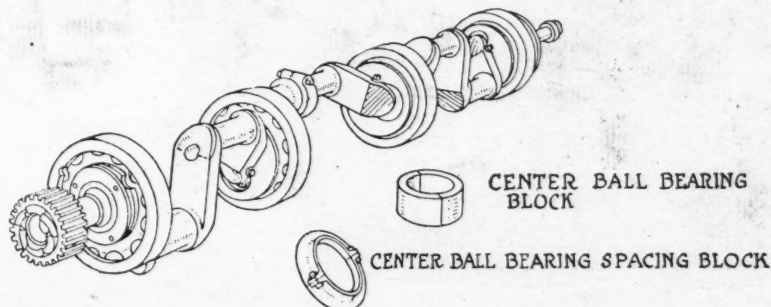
Lozier crankshaft, showing manner in which the ball bearings are held in place
